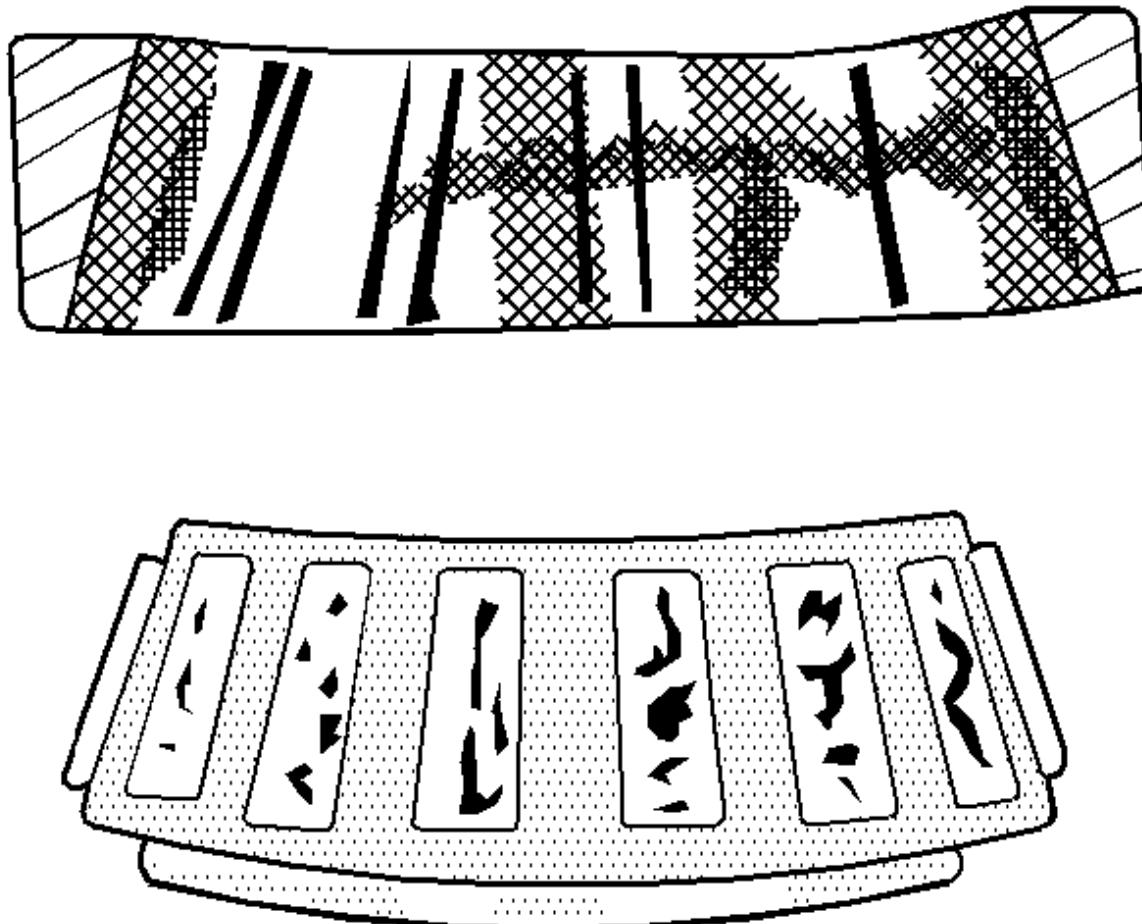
Inspecting Bearing Rollers & Races For Pitting, Grooves, Spalling & Excessive Wear
